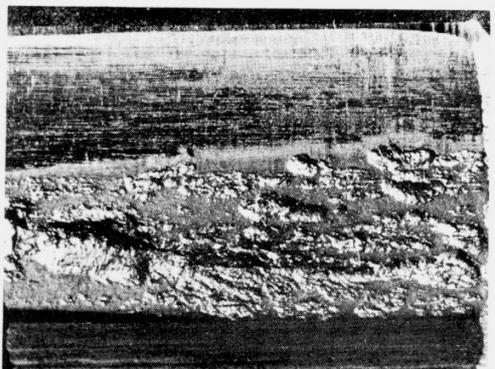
Tooth Surface Destroyed by Extensive Pitting
